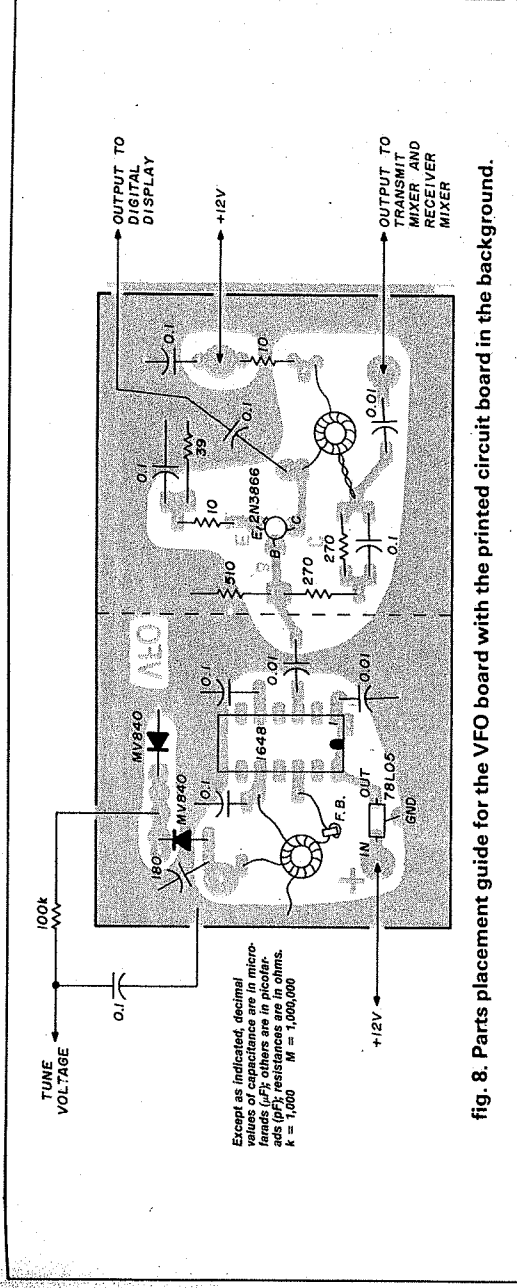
Parts placement guide for the VFO board with the printed circuit board in the background.
